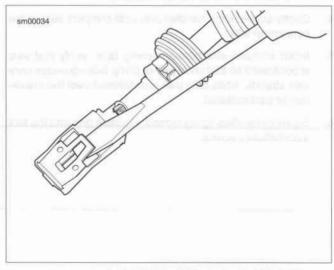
Delphi 800 Metri-Pack Sealed Main Fuse Housing: Bend Tang
